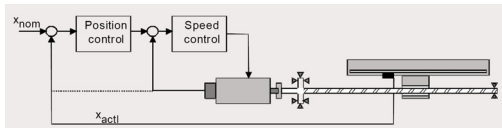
Typical drive system of a numerically controlled machine tool with linear scale on the slide and rotary encoder on the motor. Unlike in position control with rotary encoder and ball screw, a linear encoder includes the feed drive mechanism in the control loop.
